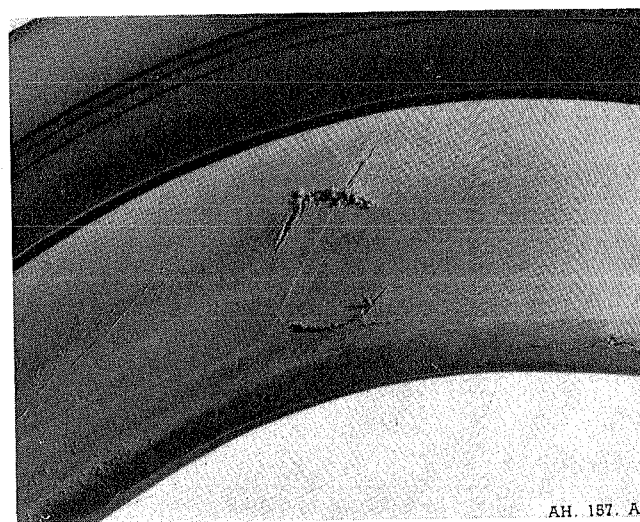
A double fracture caused by the tyre being crushed between the rim and an obstacle, such as the edge of a kerb.
